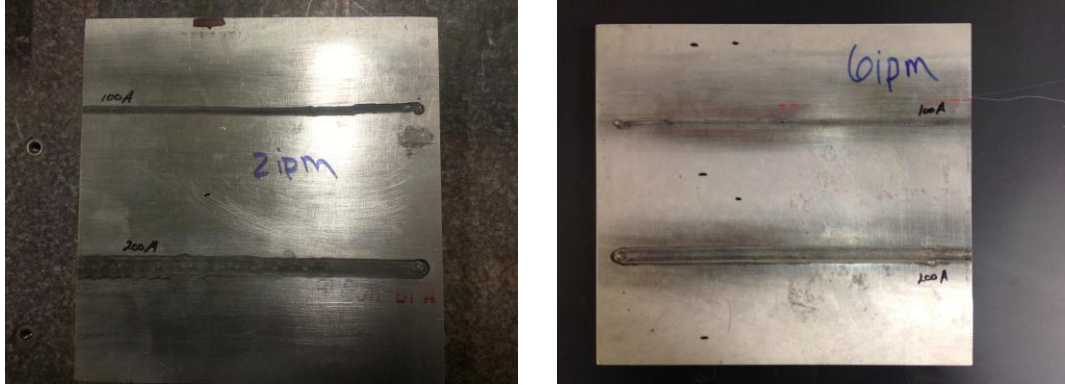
Optical macrographs of GTAW AA5456-H116 plate. The plate on the left was welded at a speed of 50.8 mm/min and the plate on the right was welded at 152 mm/min.
